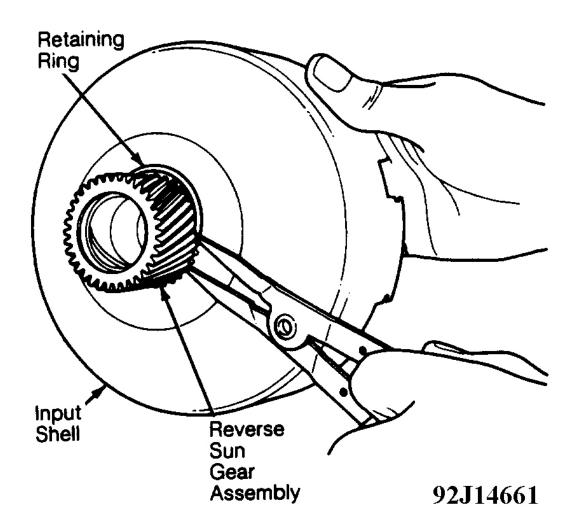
Removing Input Shell Courtesy of FORD MOTOR CO.
